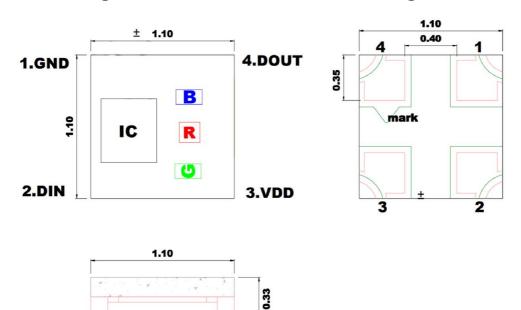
IN-PH10TAT6R6G6B Package Outline Dimensions
